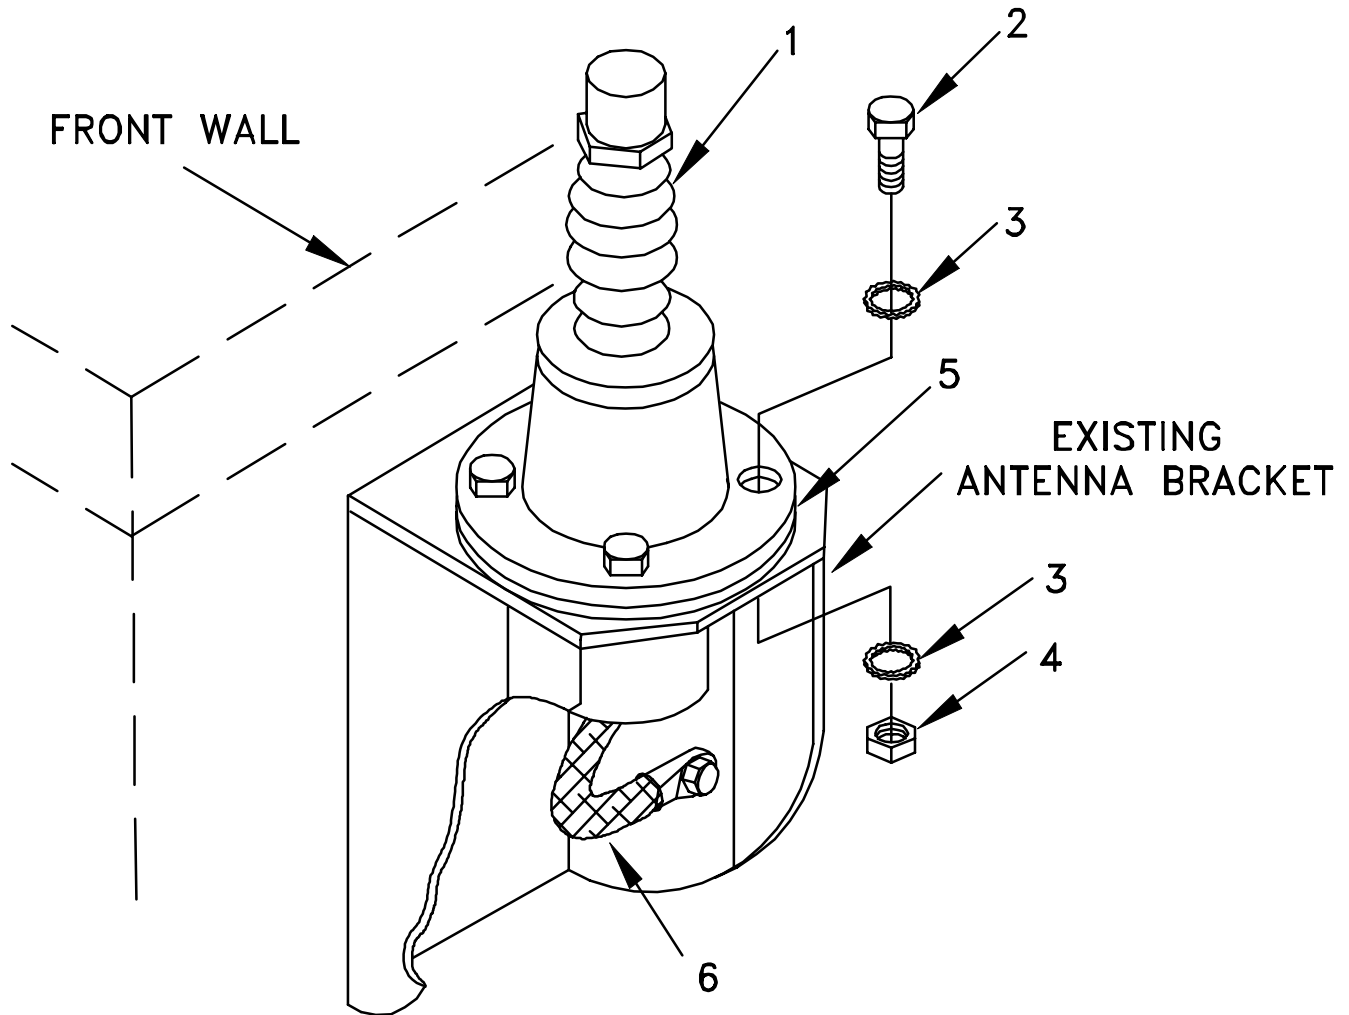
(2). MK and Radio Installation: Radio Equipment Locations
